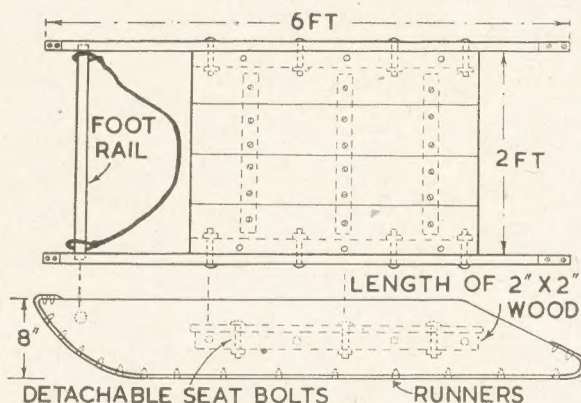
Plan and side view with dotted details of seat, fittings, etc.
